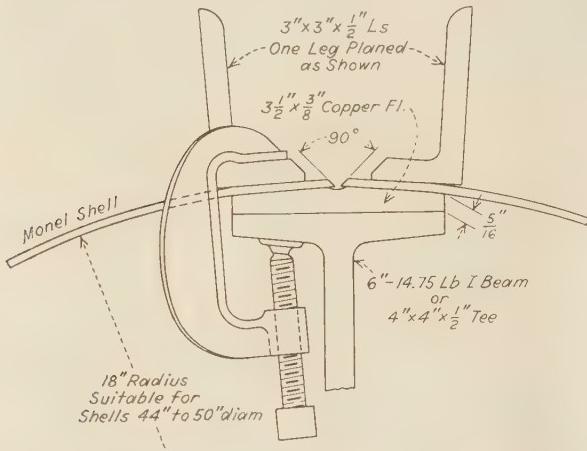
JIG FOR WELDING SHORT LENGTHS OF THIN-GAGE MONEL AND NICKEL
